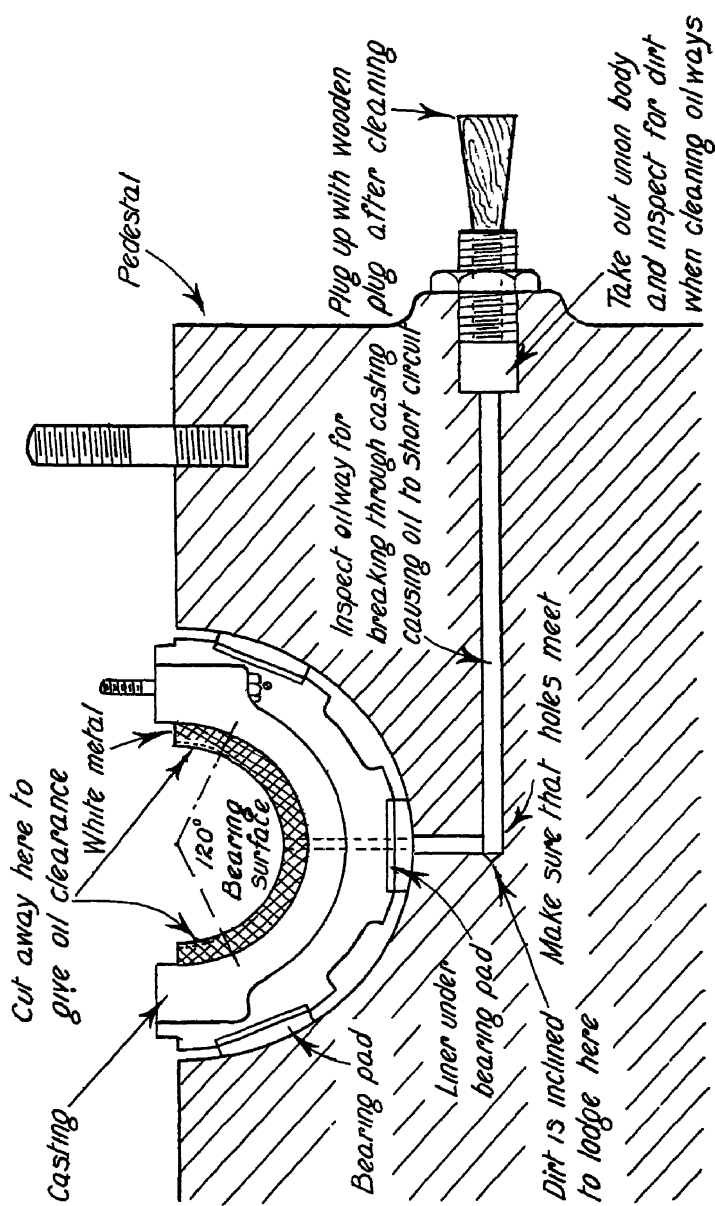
BEARING AND OIL SUPPLY HOLE IN PEDESTAL
